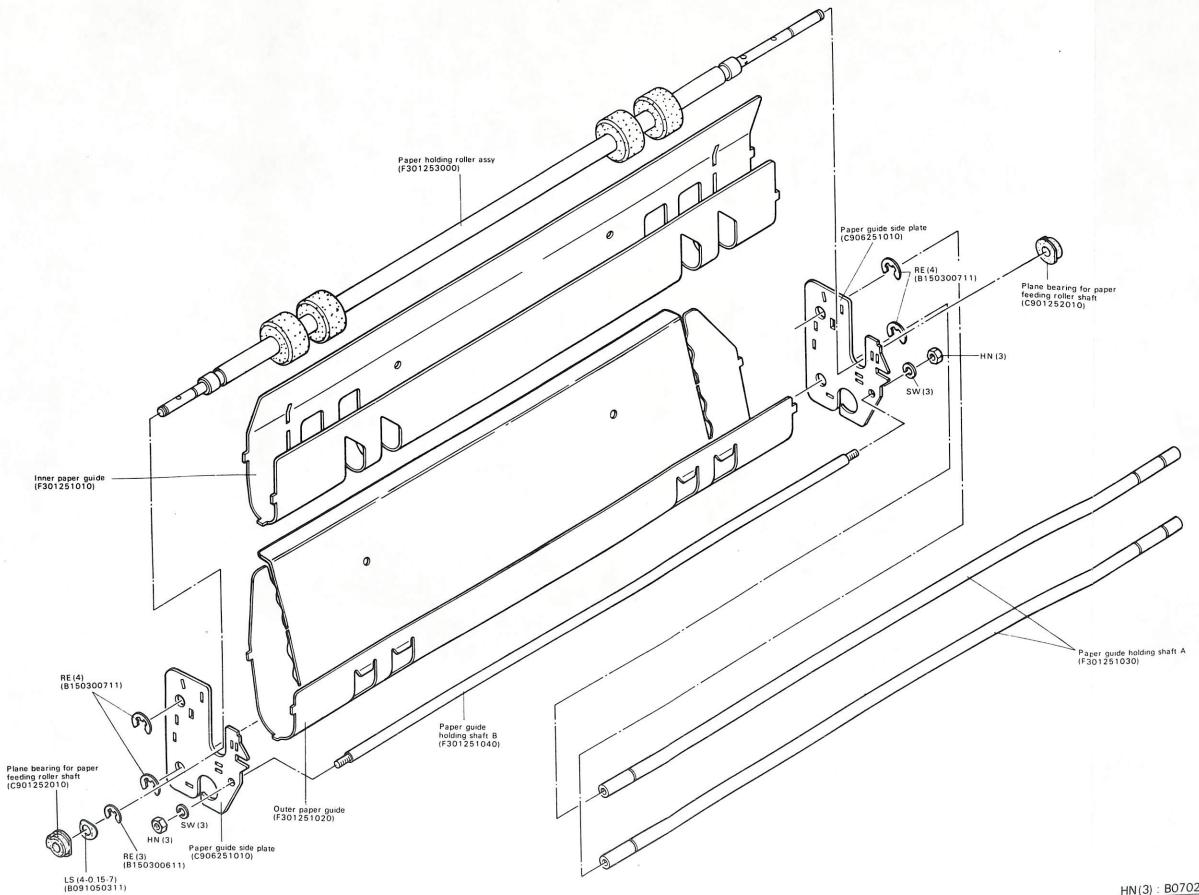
Exploded View of Paper Guide Unit (Type F)
